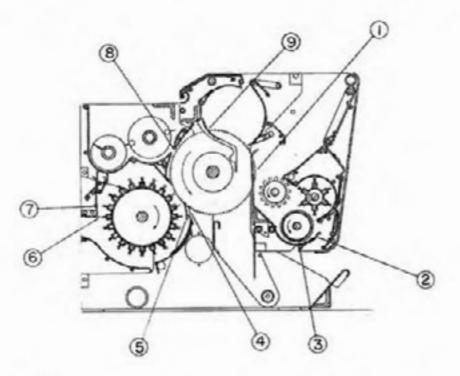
Continental 79-saw Comet and 119-saw Comet Supreme Brush-type Gins.
